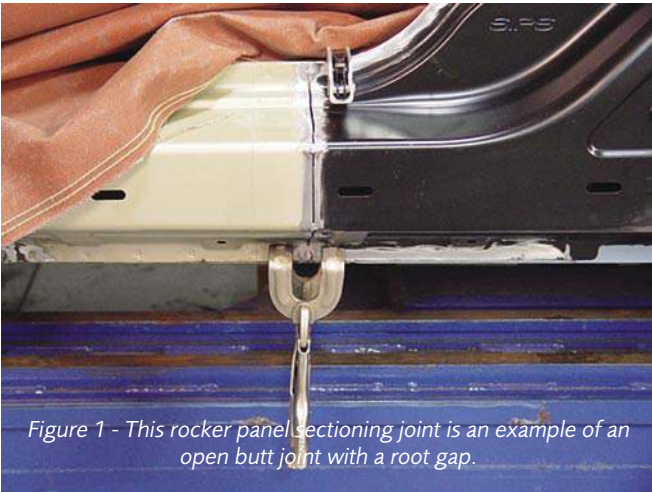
This rocker panel sectioning joint is an example of an open butt joint with a root gap.
